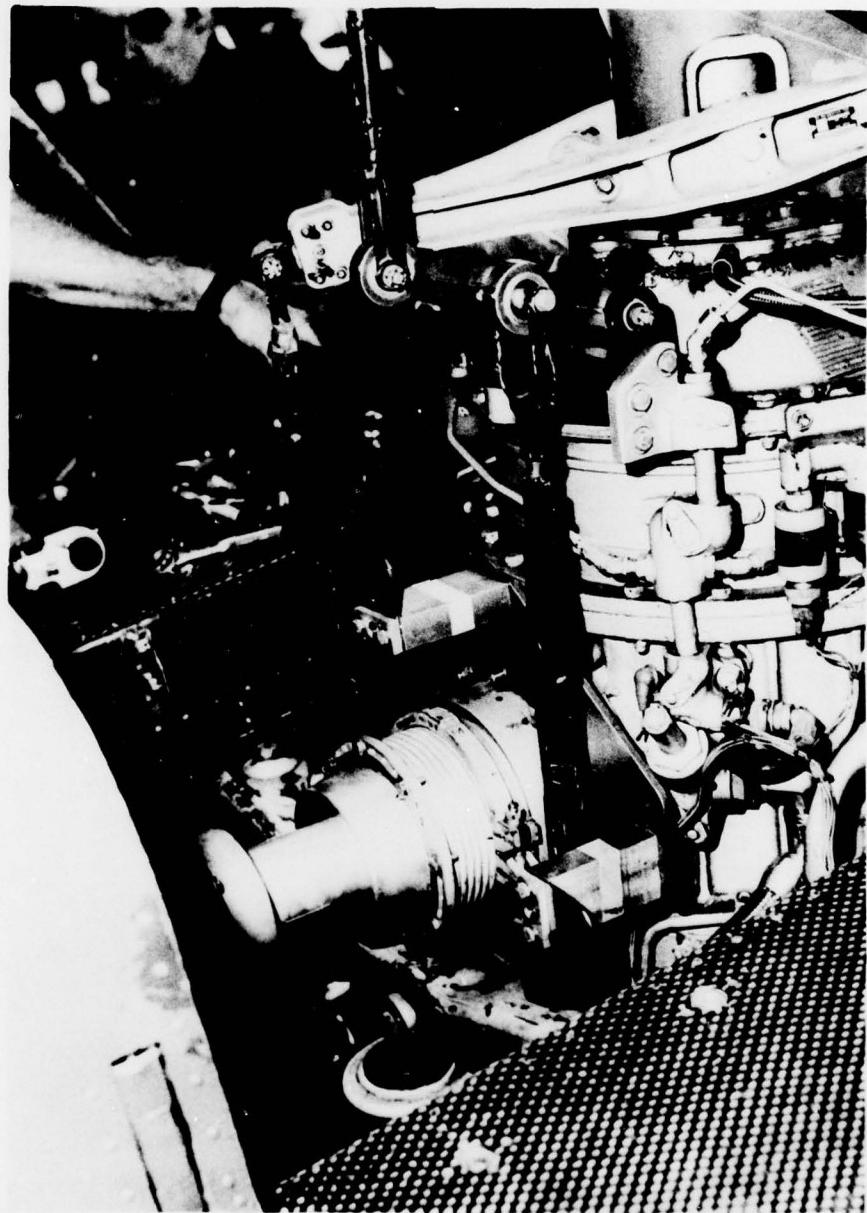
Mount Plate Installed, Particle Separator and Induction Baffle Removed.
